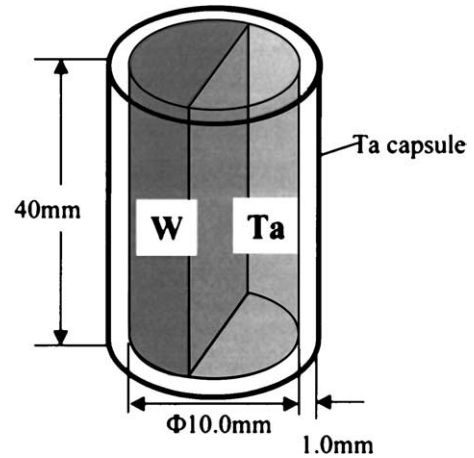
Configuration and dimensions of bonded Ta–W sample.
